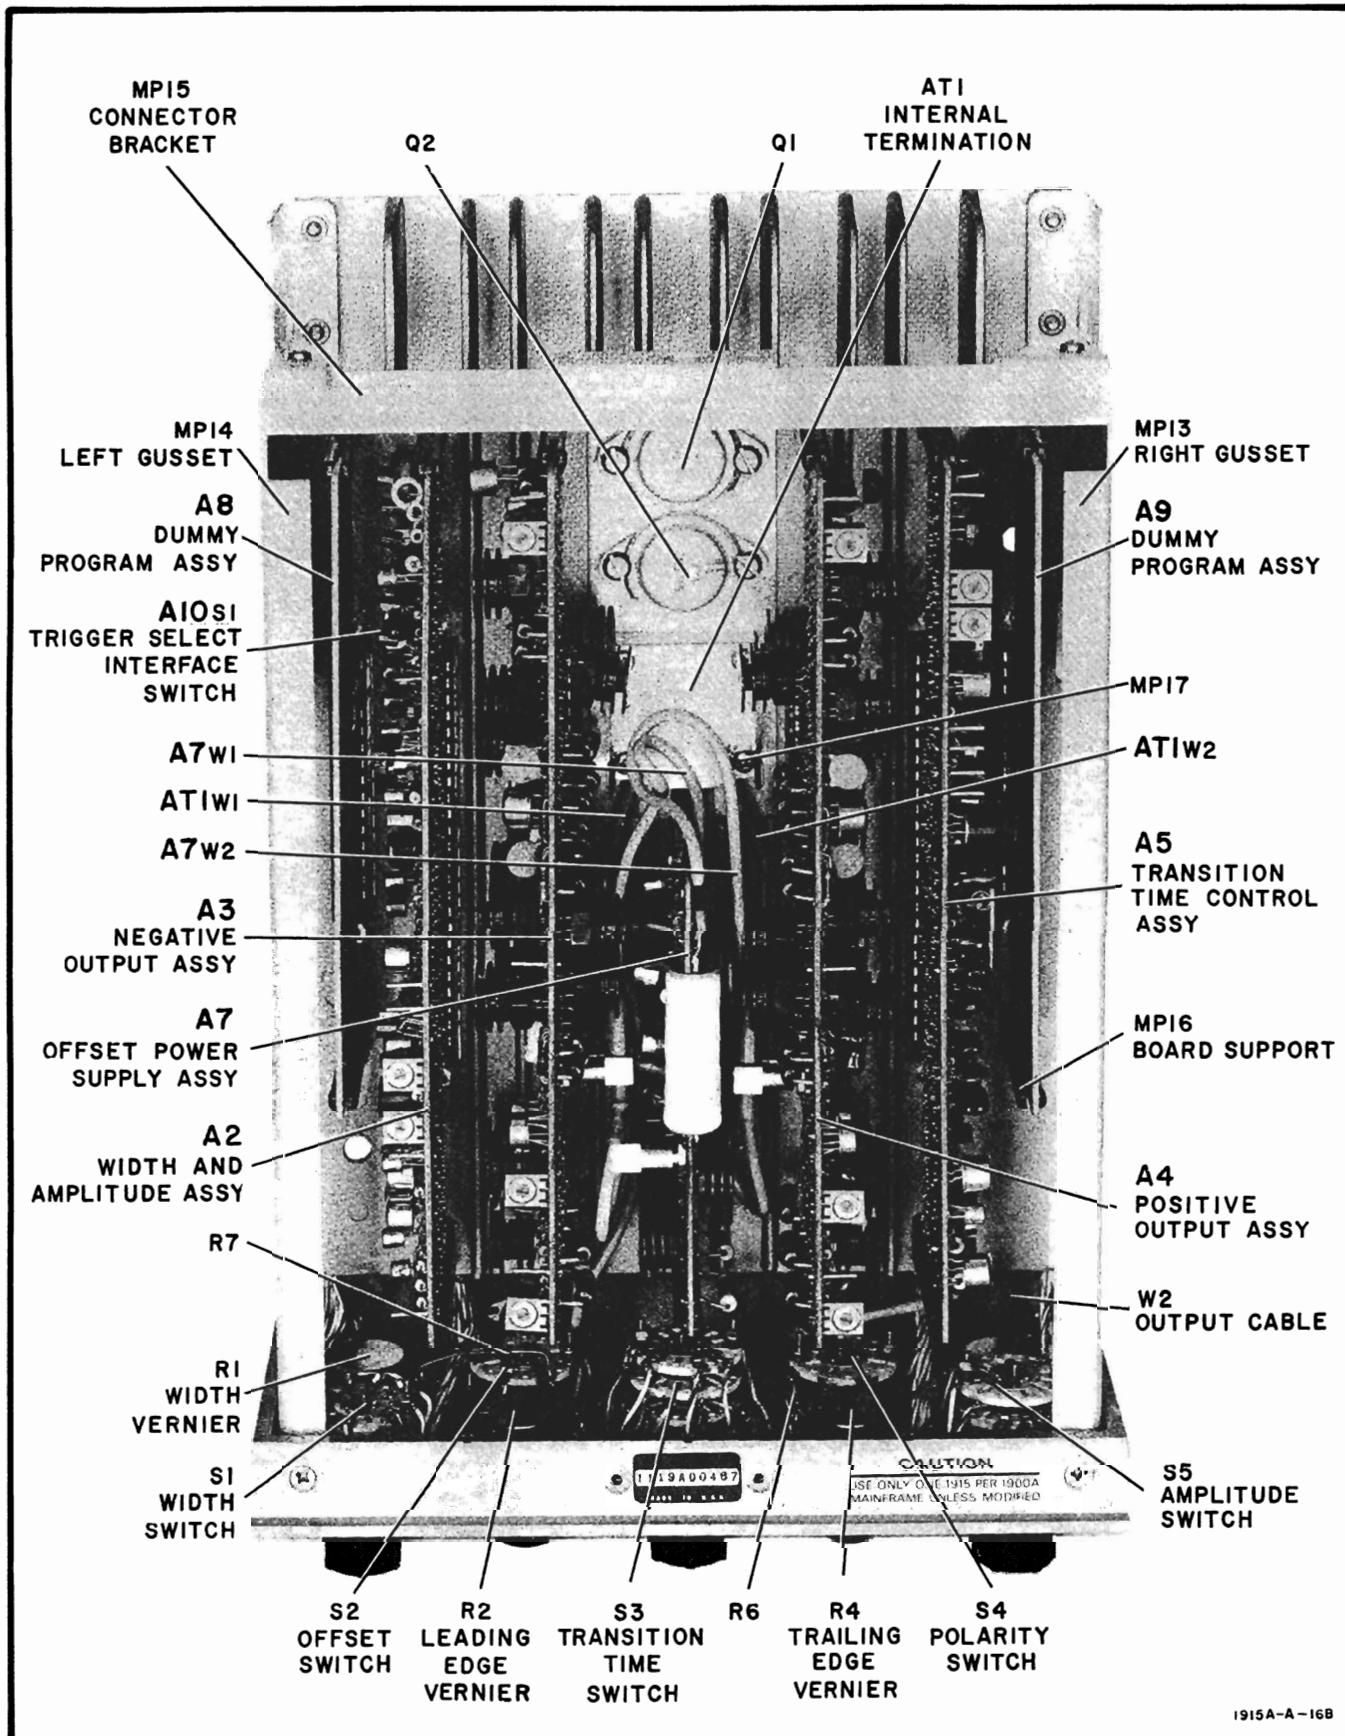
Assemblies and Chassis Mounted Parts Locations (Top View)
